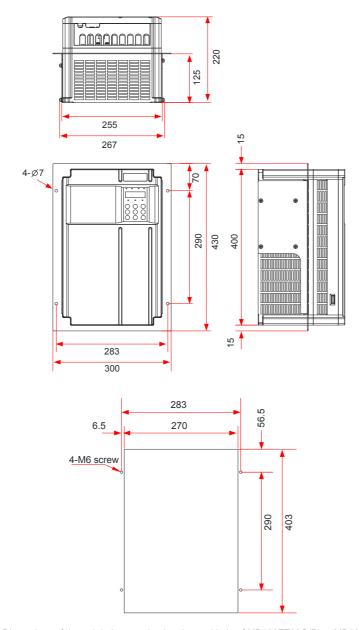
Dimensions of through hole mounting bracket and hole of MD500ET30G(B) to MD500ET37G(B)
